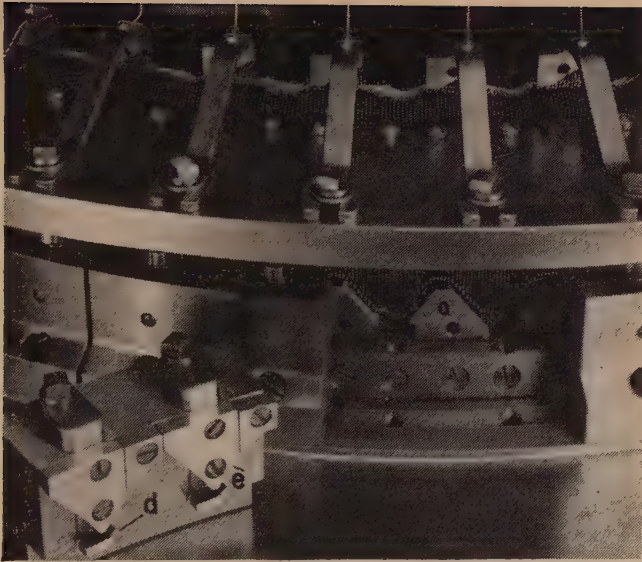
View of knitting cams of Brinton RMP machine, with section of cam block removed to expose cushion-type cams.
